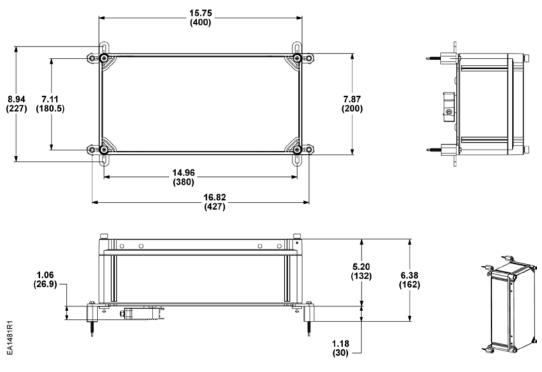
Dimensions of the ASK75.1U Weather Shield in Inches (Millimeters).
